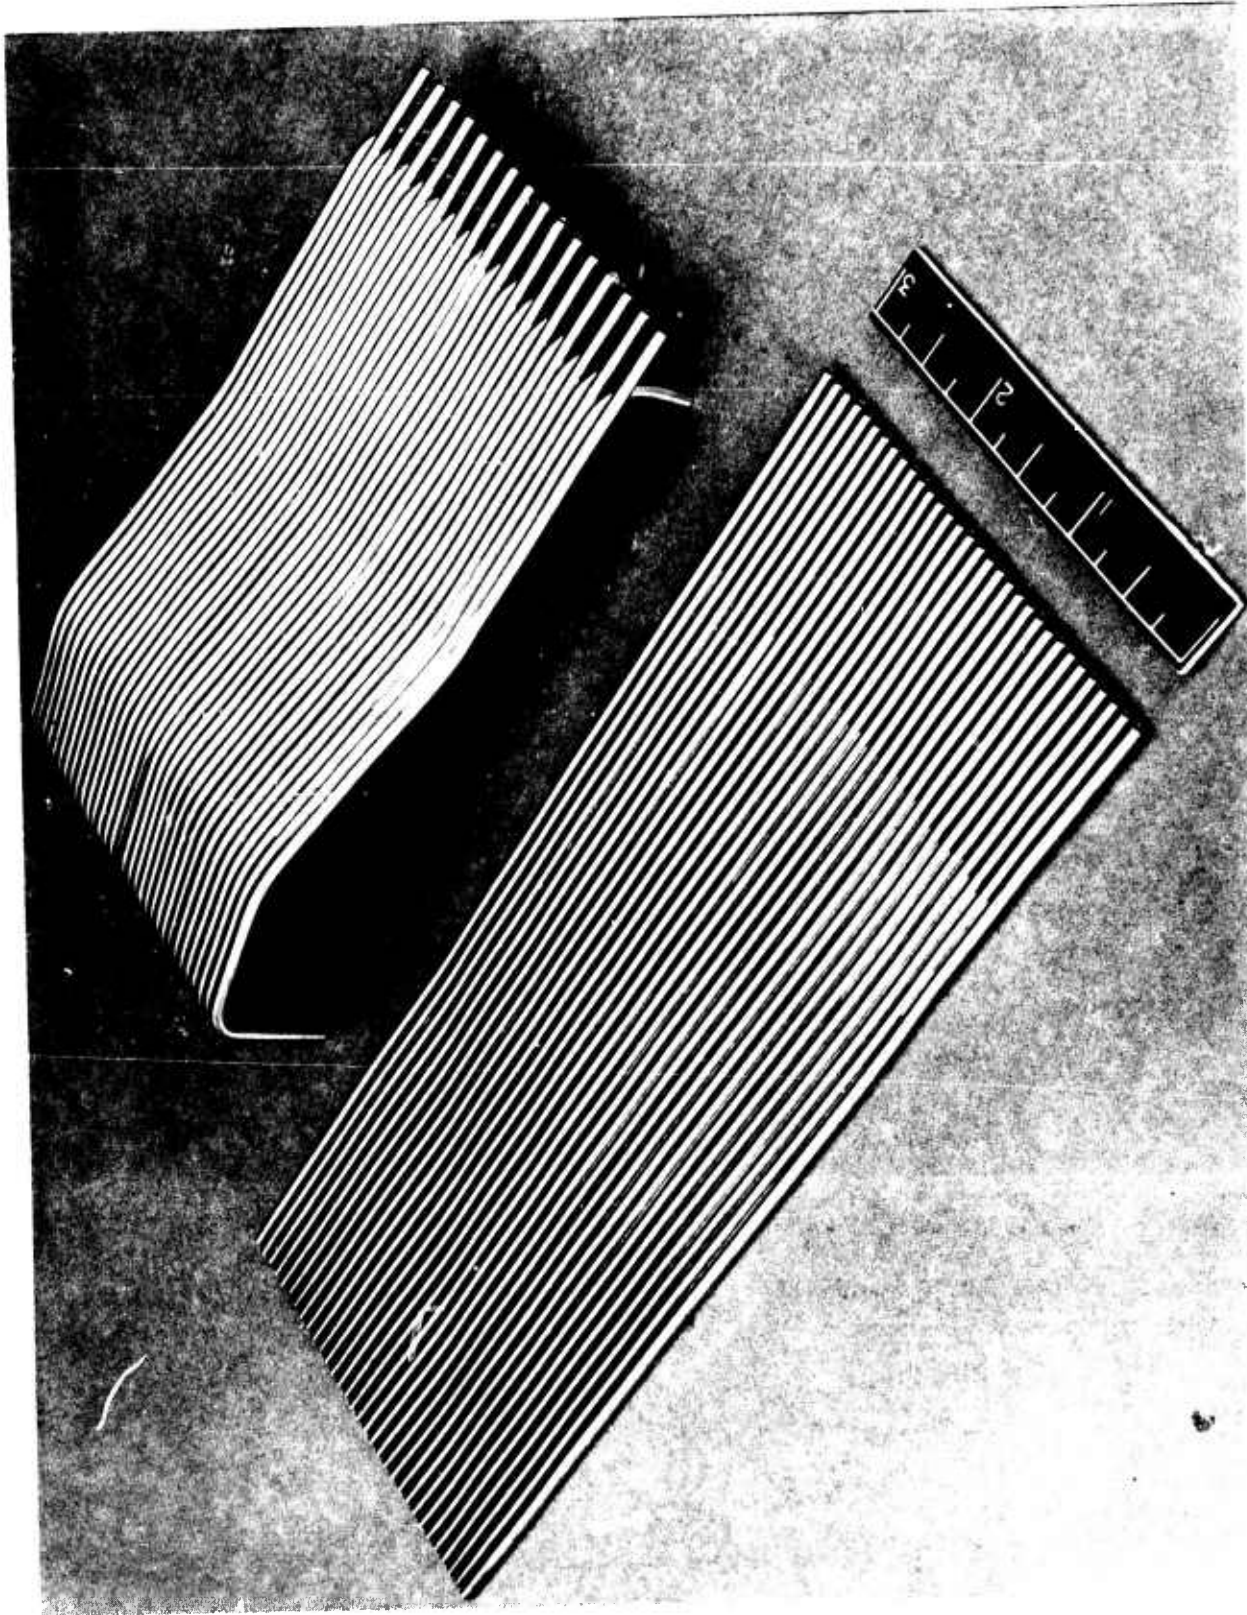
Sample EB-Welded Tube Blankets Before and After Forming
